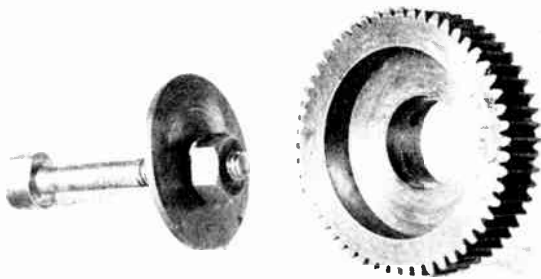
PARTS OF SIMPLE BALL-RACE EXTRACTING DEVICE.
